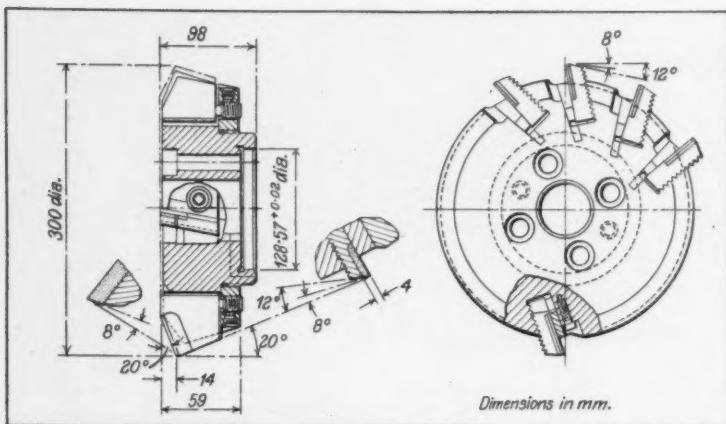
Details of the tungsten carbide tipped, inserted tooth milling cutters employed for profile-milling propeller blades on the Gorki machine
